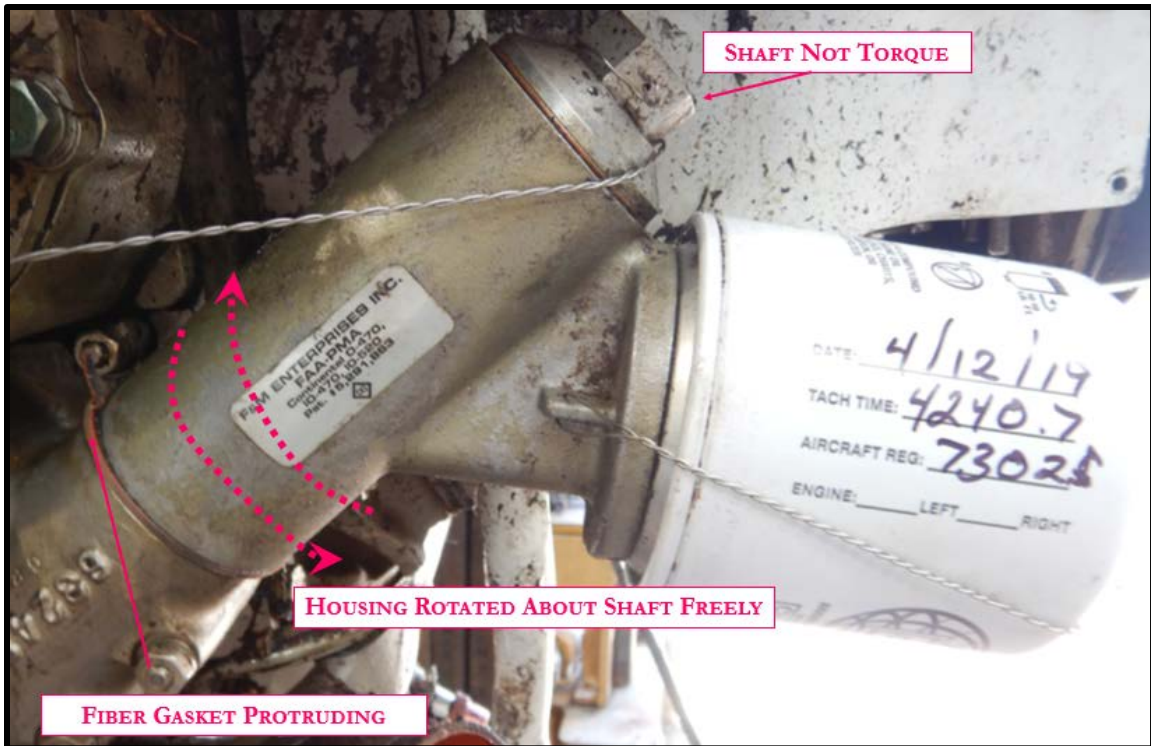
Oil Filter Adapter as Installed on Oil Pump Bore
